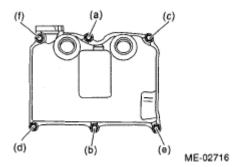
Identifying Rocker Cover Bolts - LH Side
